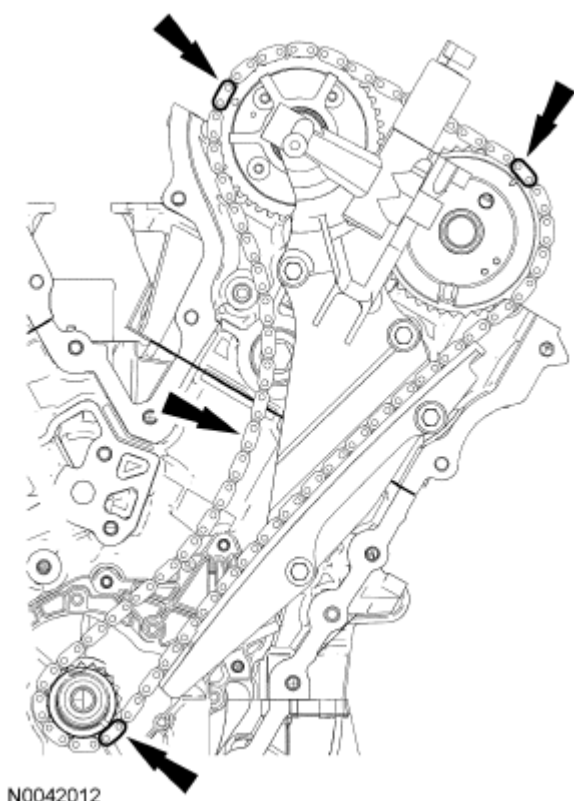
Aligning Marks On Timing Chain With Marks On Camshaft And Crankshaft Sprockets
